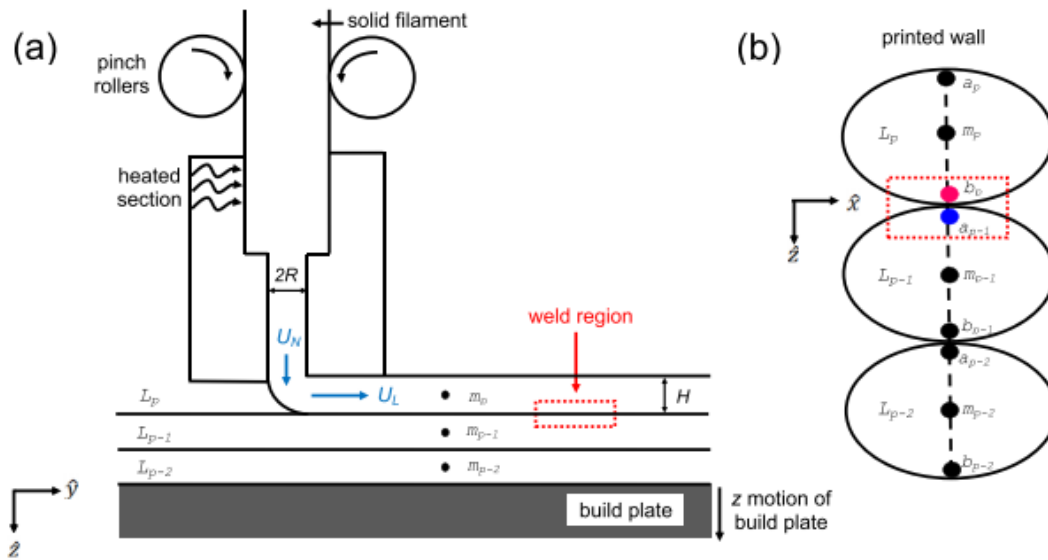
Weld formation of deposited material during FFF 3D printing
